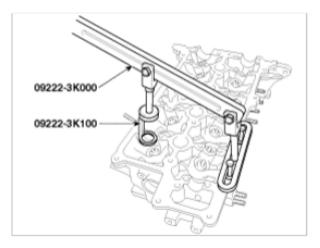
Compressing Valve Spring Using SST (09222-3K000 And 09222-3K100) Courtesy of HYUNDAI MOTOR AMERICA
